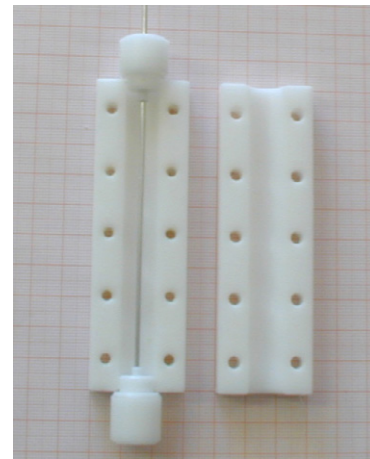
Photograph of a mould employed for the final assembly of the actuator.
